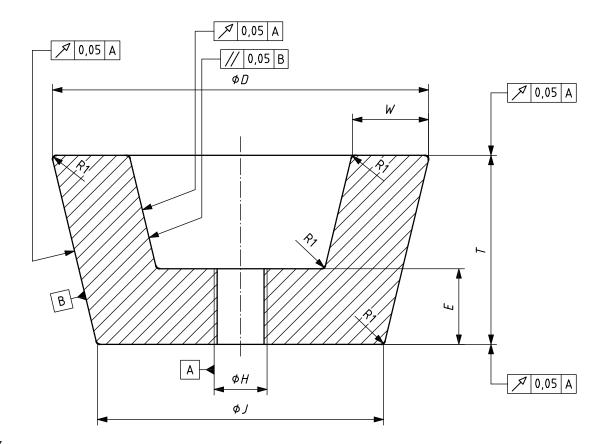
Geometrical dimensions and machining tolerances for type 27 test wheels
